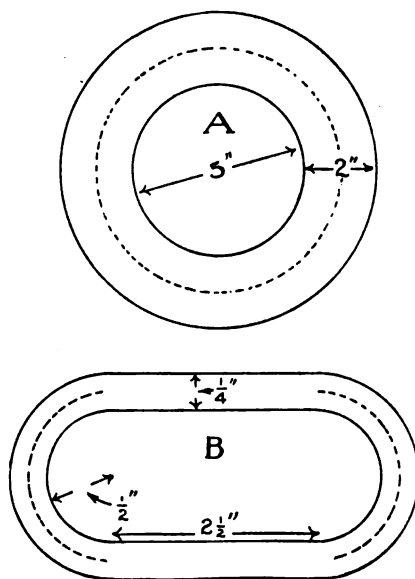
CALCULATING AMOUNT OF STOCK FOR FORGING IRREGULAR SHAPED PIECES.
